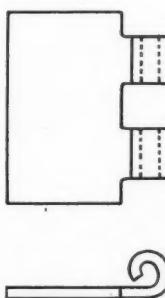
Hinge-like workpiece before being redesigned to the form of Fig. 12.
